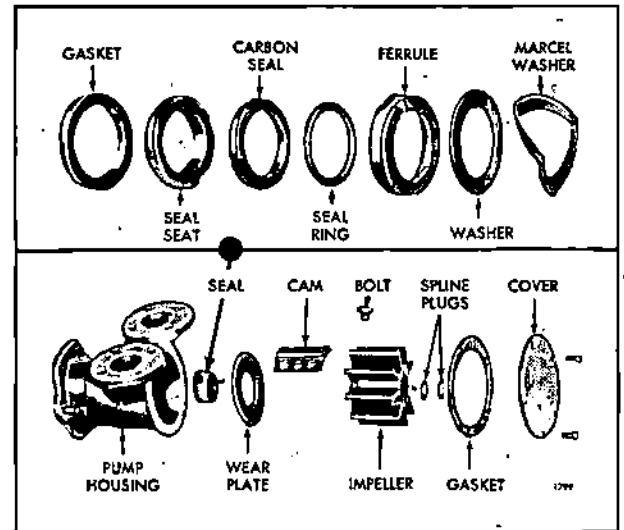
Raw Water Pump Details and Relative Location of Parts
